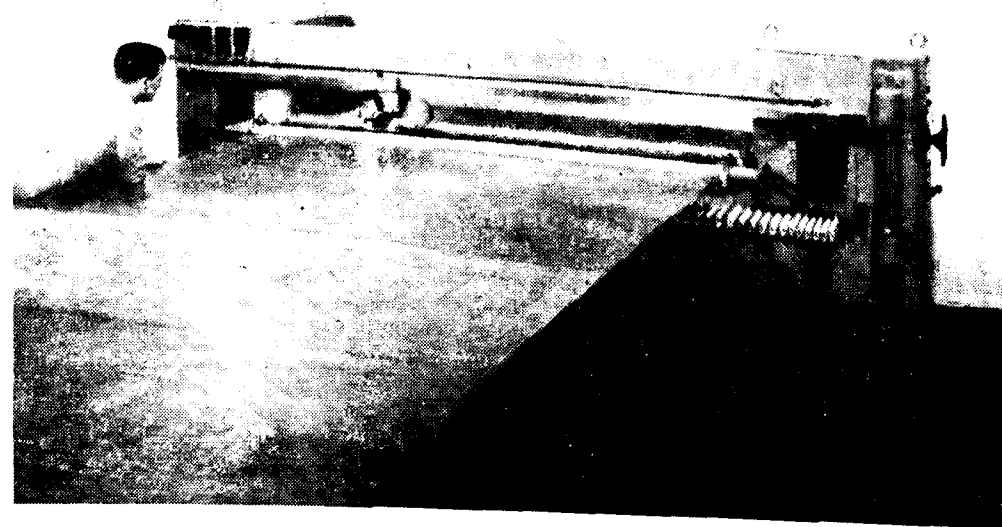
Cross bar foil butt seam welding machine for foil butt seams of large sheets.
